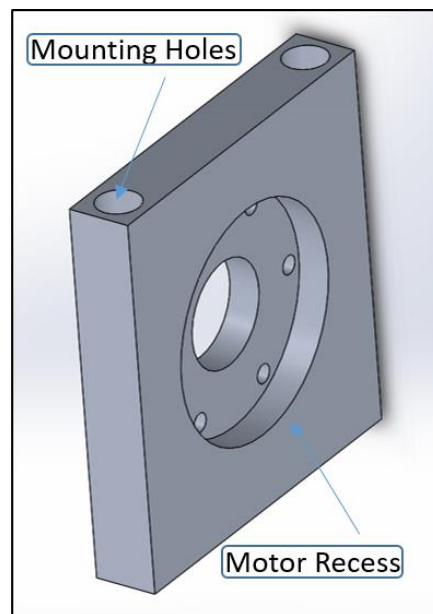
Motor Bracket. Attachment point for both the motor and the control plate.
